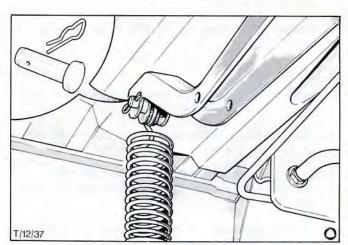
Disconnect spring clevis pin from LAV operating arm.
